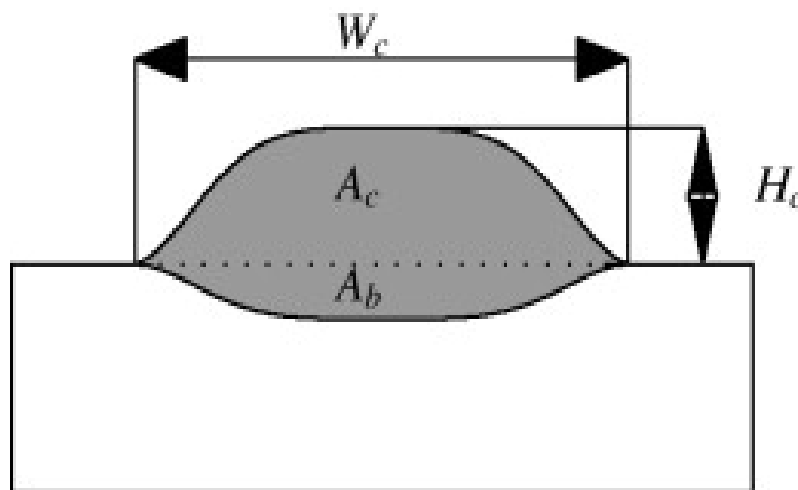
Geometric data of a weld track and surface [40].
